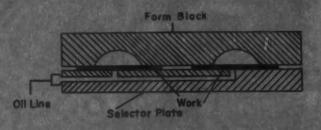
Diogrammatic representation of form-block and selector plate setup that is employed in forming parts by oil pressure.
